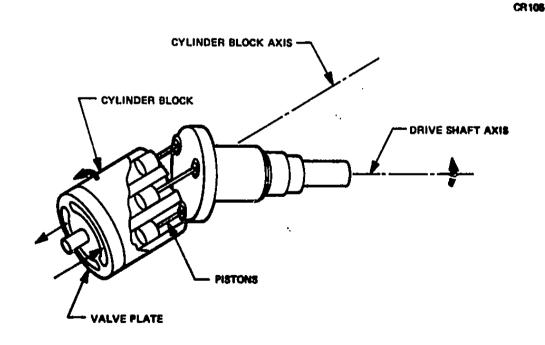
Bent-Axis, Valve-Plate Axial-Platon Pump
